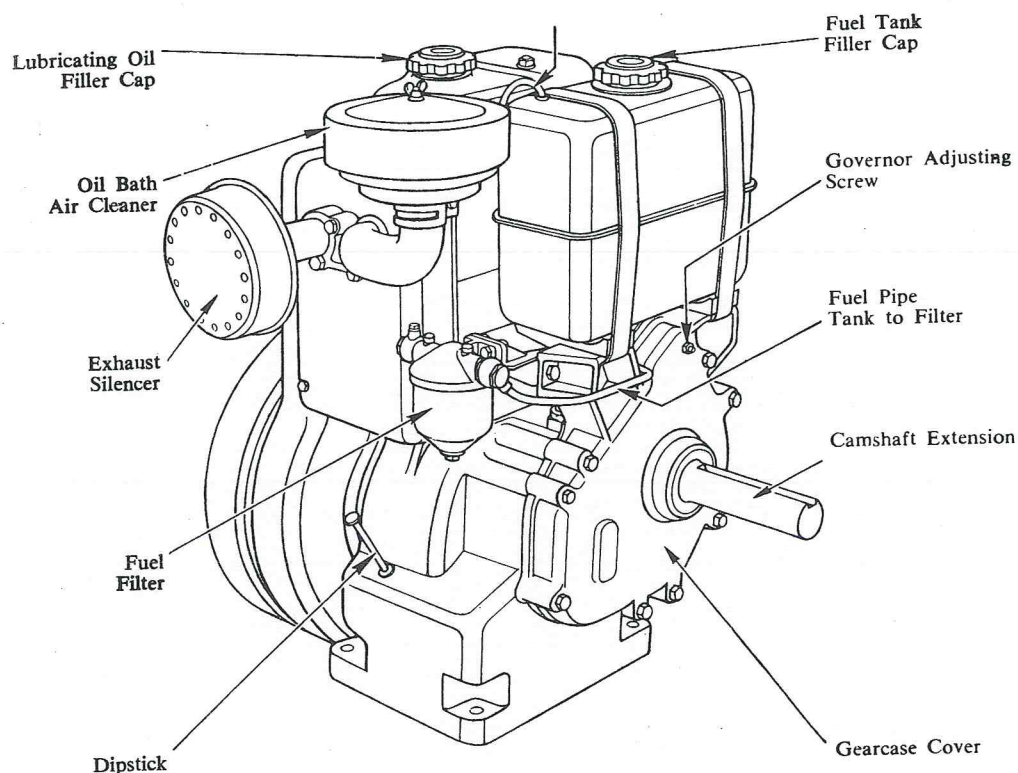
Type LD1 or SL1 Engine—Back View.
